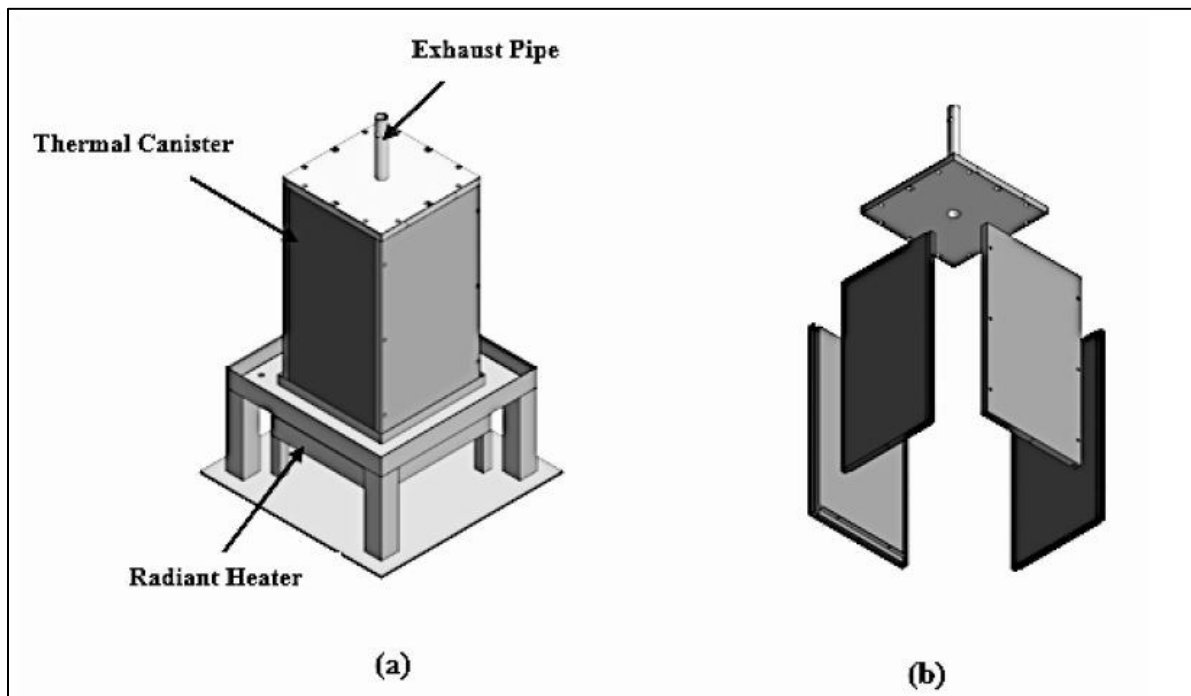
(a) Assembled view and (b) exploded view of the Thermal Canister. [76]
